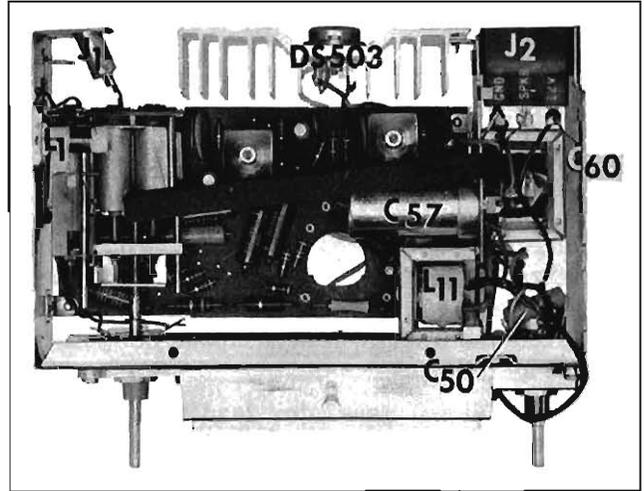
CHEVROLET PARTS LAYOUT TUNER VIEW - 985875 - RADIO
